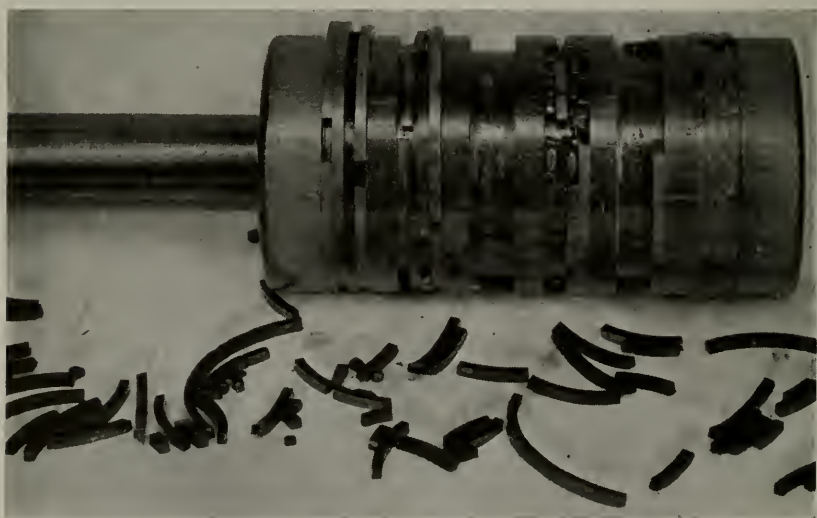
Carbon-dioxide compressor piston and rings damaged by a piece of valve spring which worked its way between the piston and cylinder wall.
